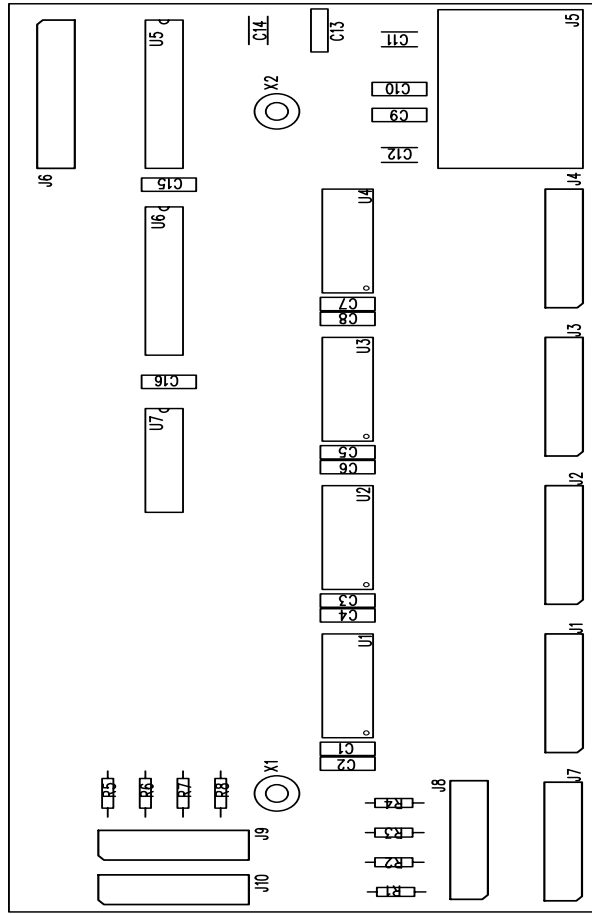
Audio mix module PCB, silkscreen/assembly drawing.
